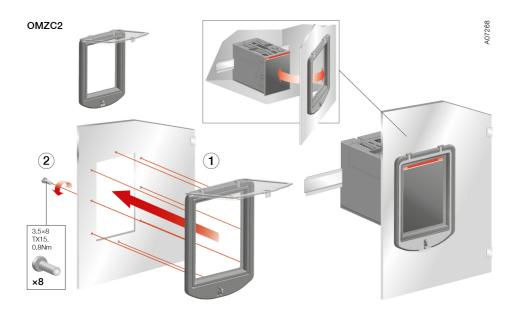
Automatic control unit OMD800, DIN-rail mounting with the cover plate, door drilling for the cover plate OMZC2, see Accessories, Section 10
